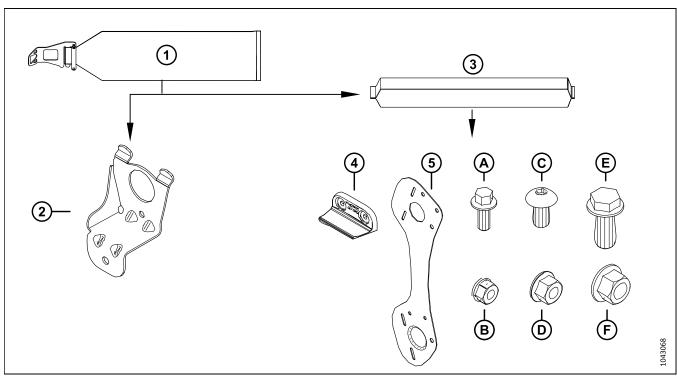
Parts to Retrieve from Nine-Bat Reel Endshields Parts Bag - MD #368328
